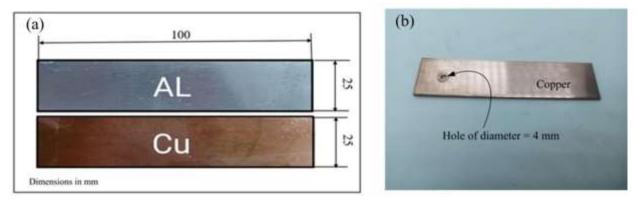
Specimens dimensions; (a) sheets, (b) copper hole
